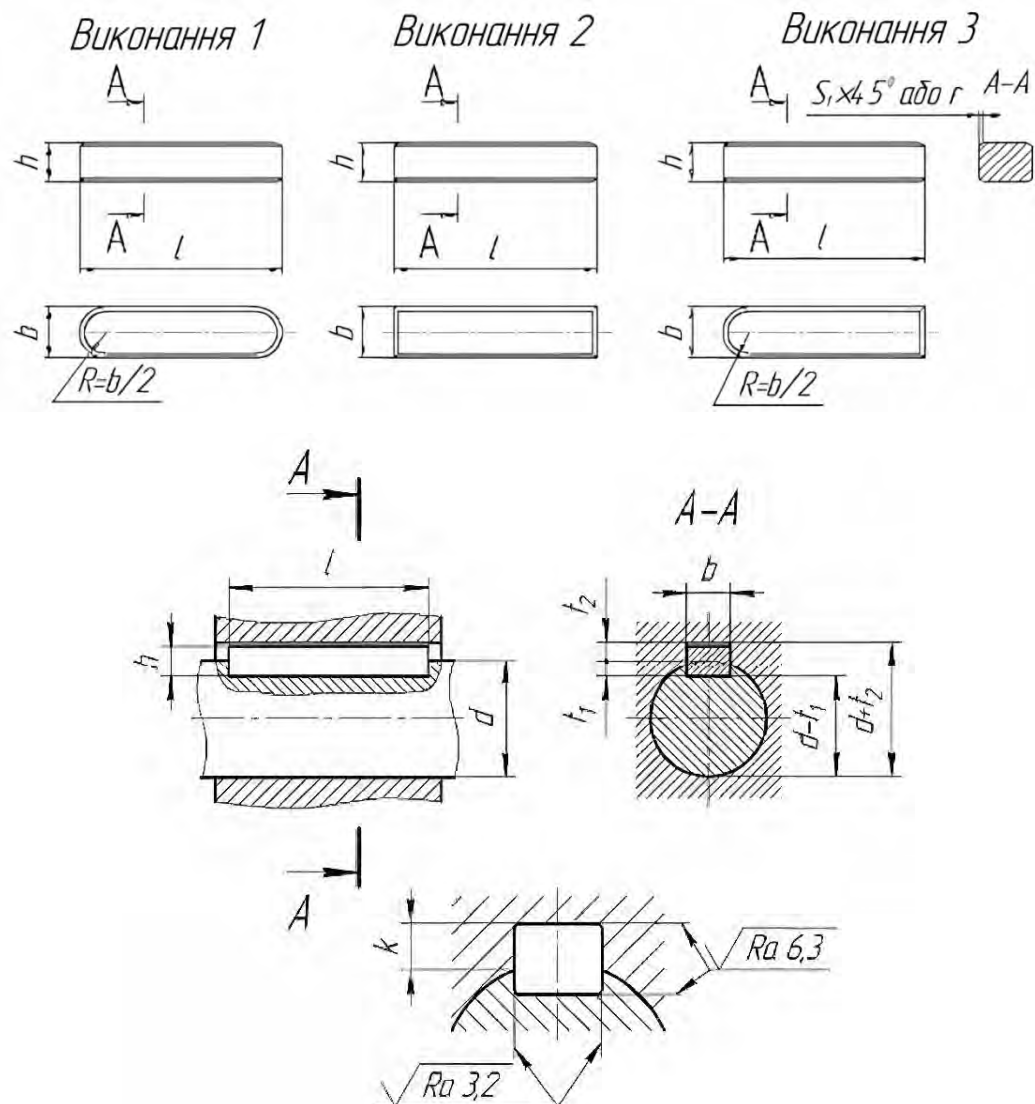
Drawings with designations of main dimensions (to Table 1)
